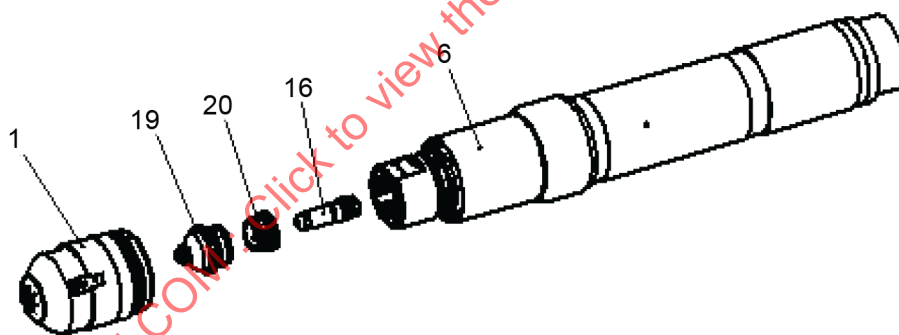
MECHANICALLY GUIDED plasma TORCH
